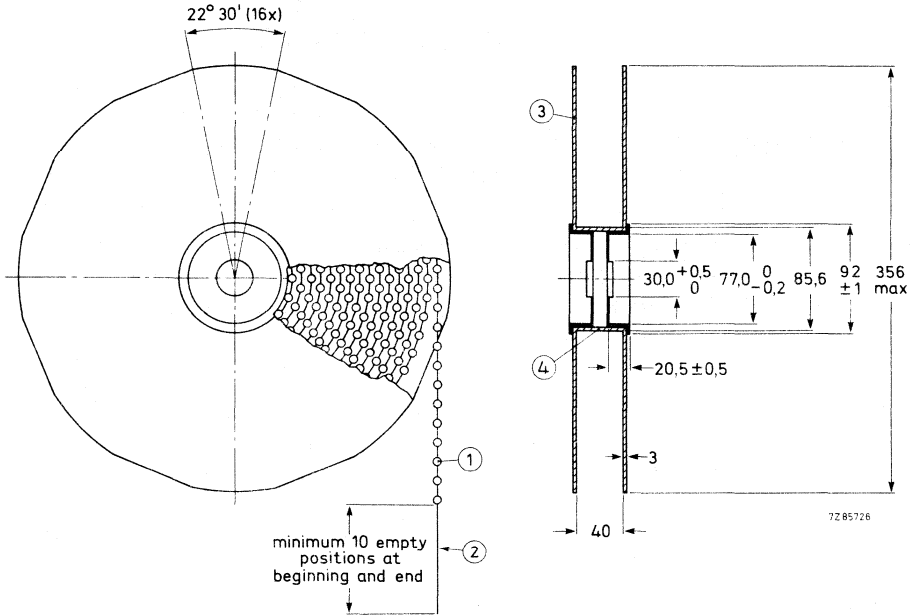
Reel dimensions (mm) for radial-taped diodes.
